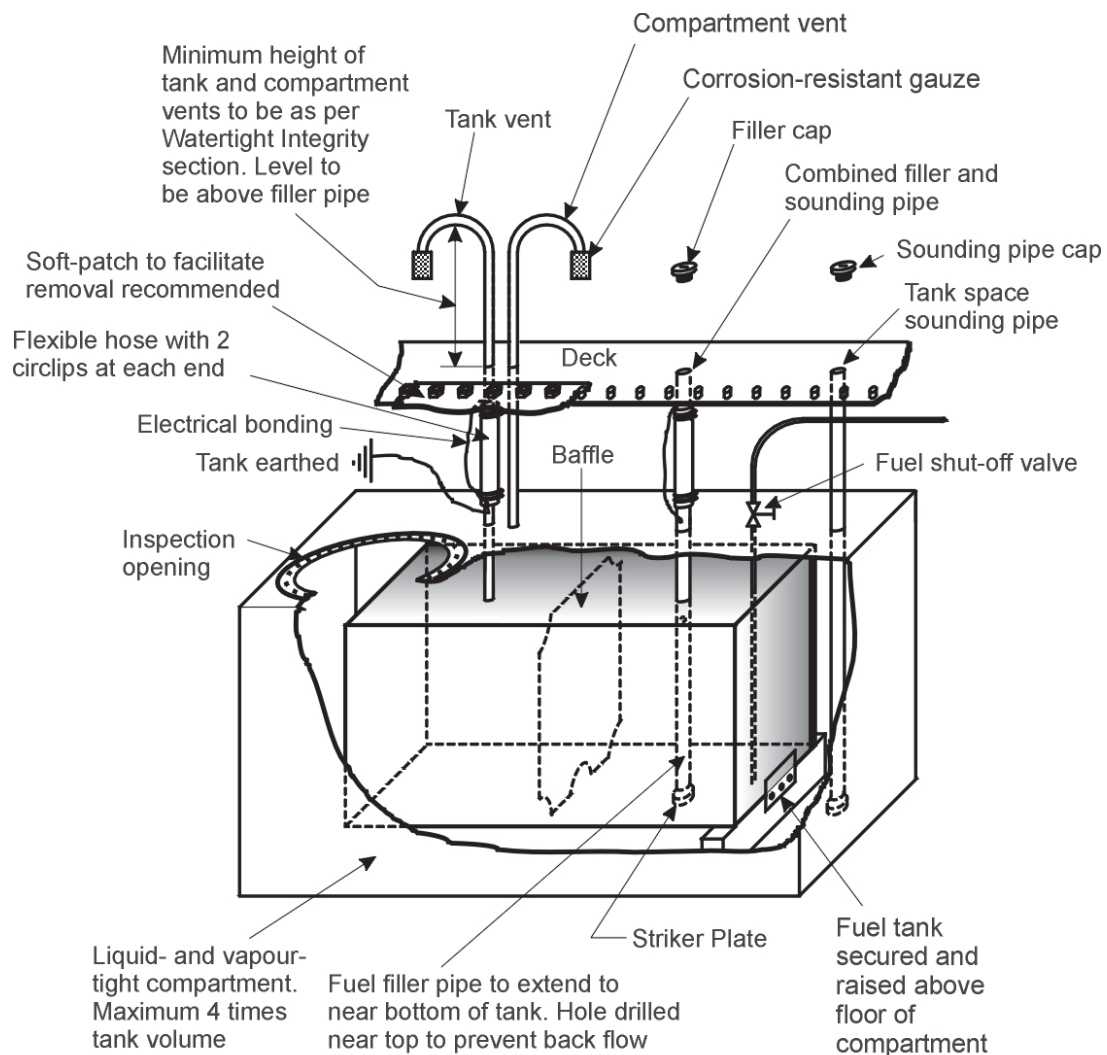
Alternative example of an under-floor fuel tank installation for fuel less than 60°C flashpoint (informative)
